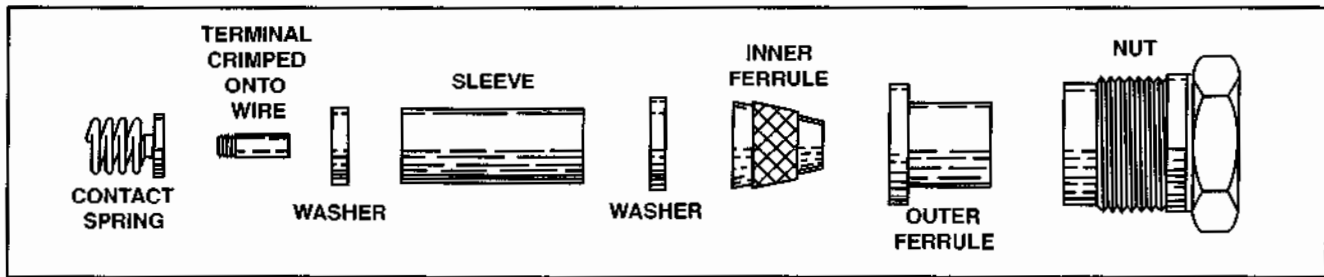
The magneto end terminal of a typical ignition lead is crimped to the cable with ferrules.
